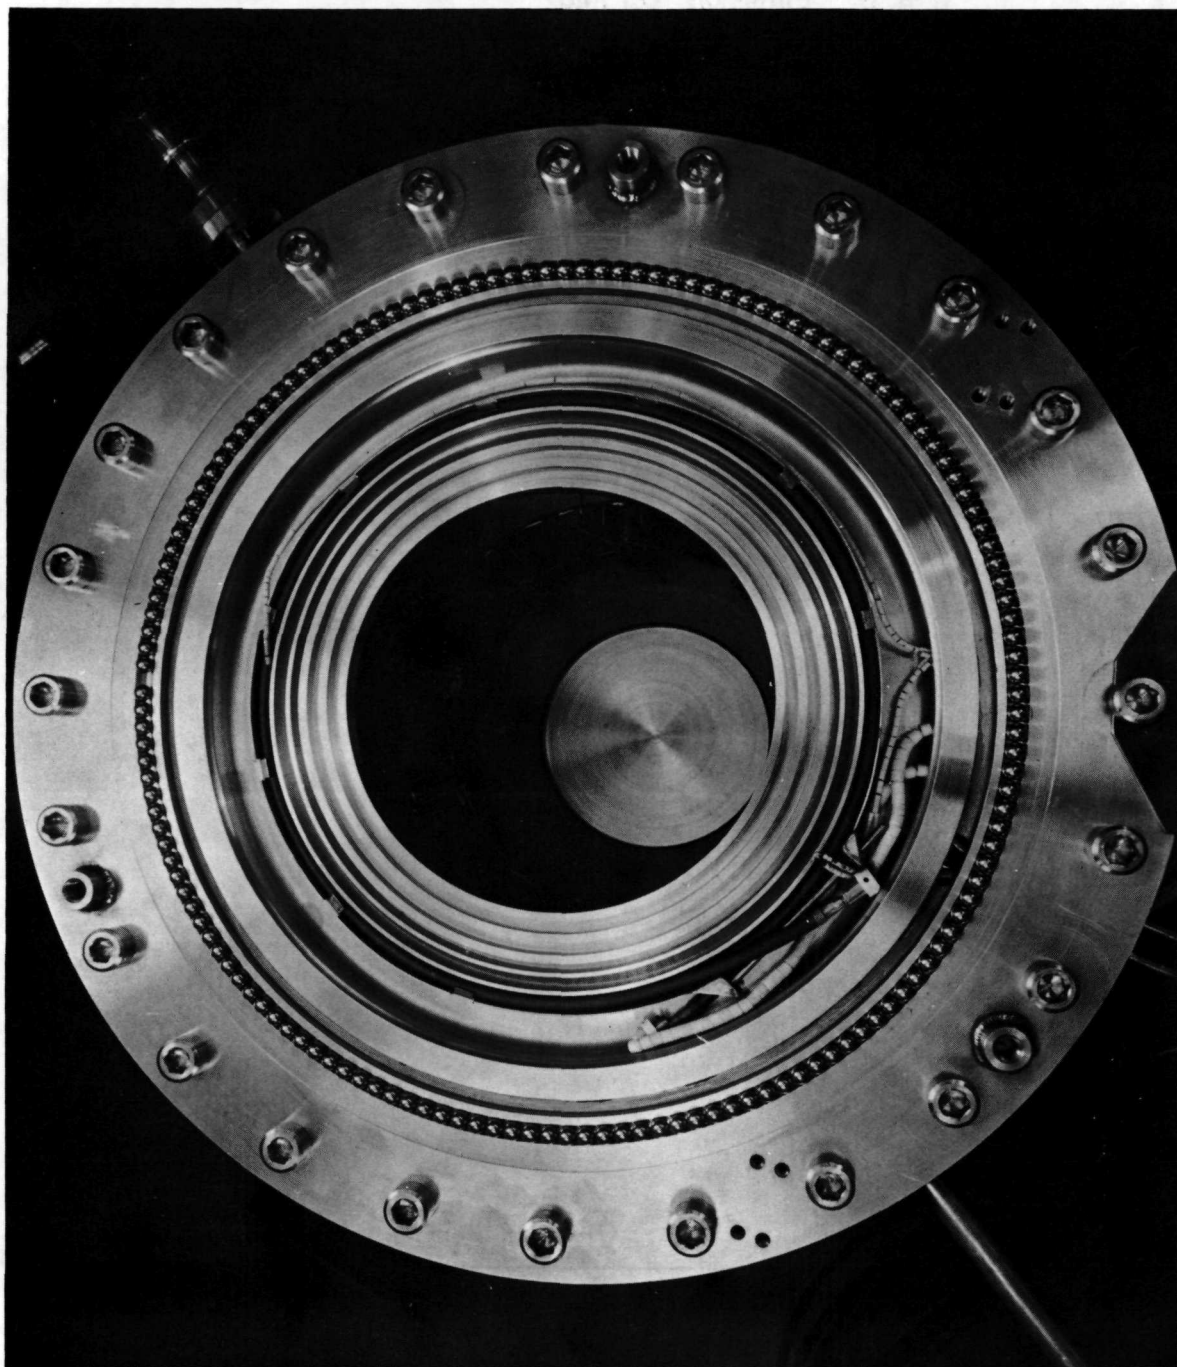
PHOTOGRAPH OF THE STATOR OF UHV ROTATABLE FLANGE
